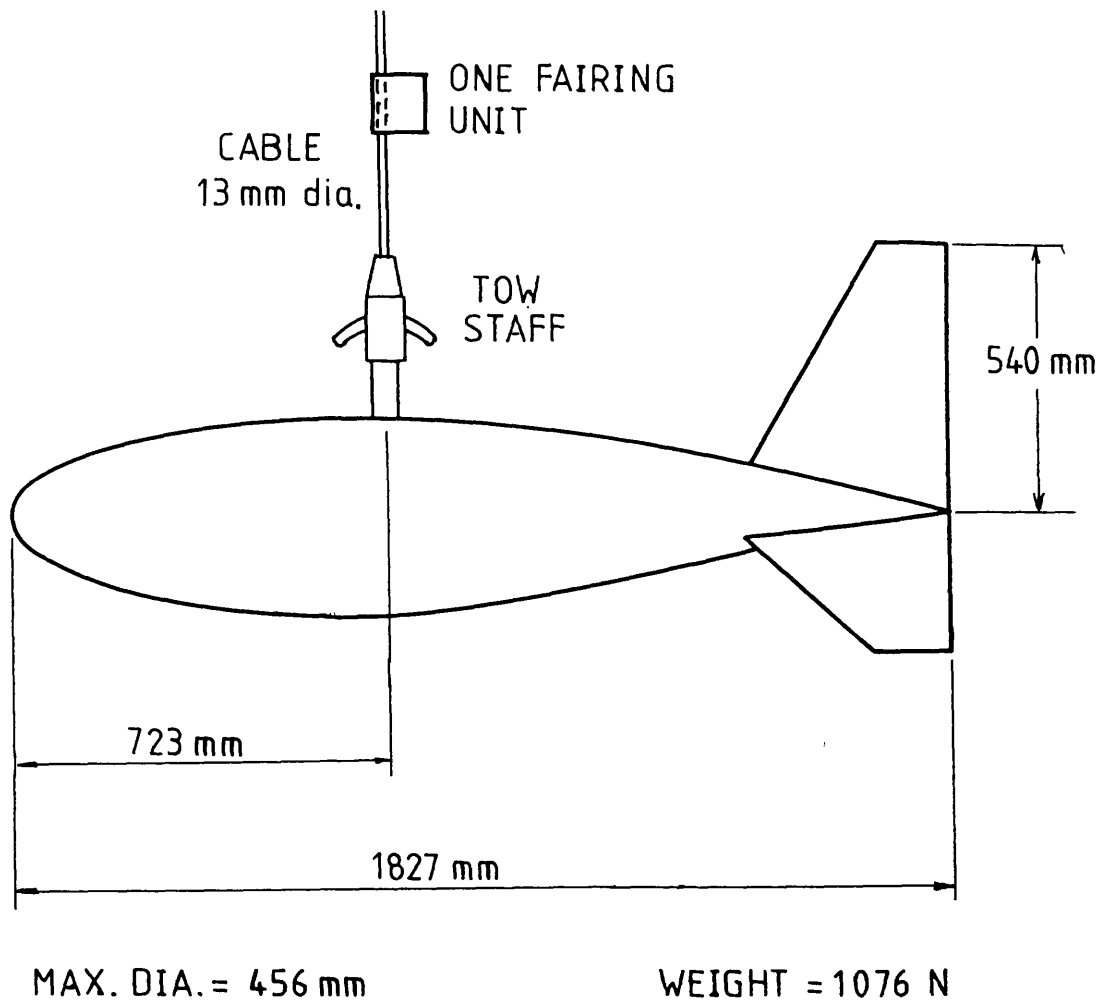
DIMENSIONS OF FISH, CABLE AND FAIRING
